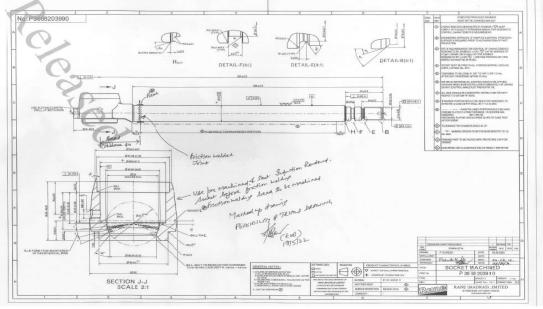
Piston Rod Friction welding Drawing.
